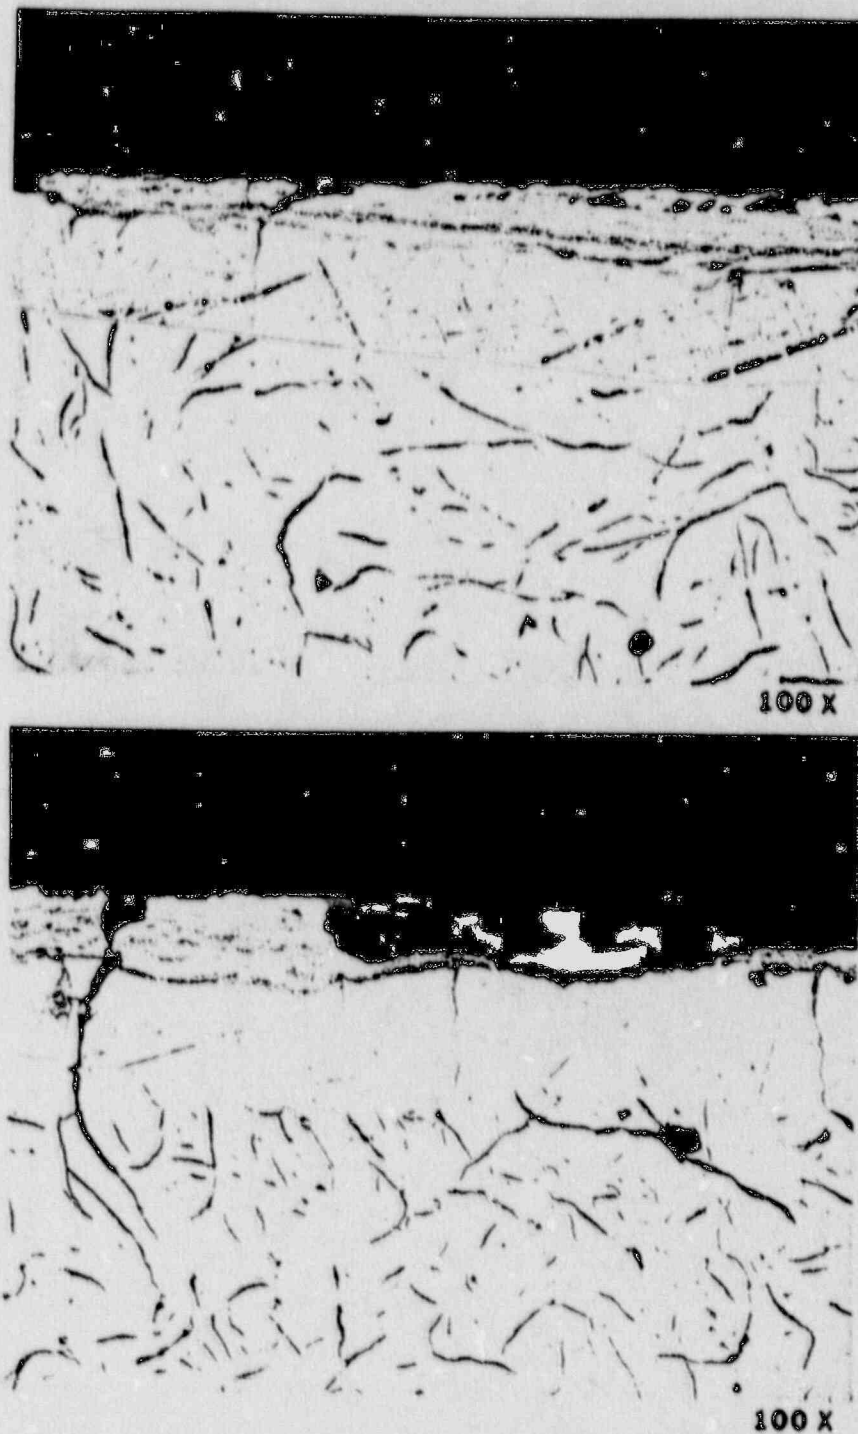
Longitudinal cross-section of the non-thrust side of the B diesel 7L liner taken 16.5 inches from the bottom of the liner. Typical examples of the metal deposited from the piston and rings on the Cr plating.
